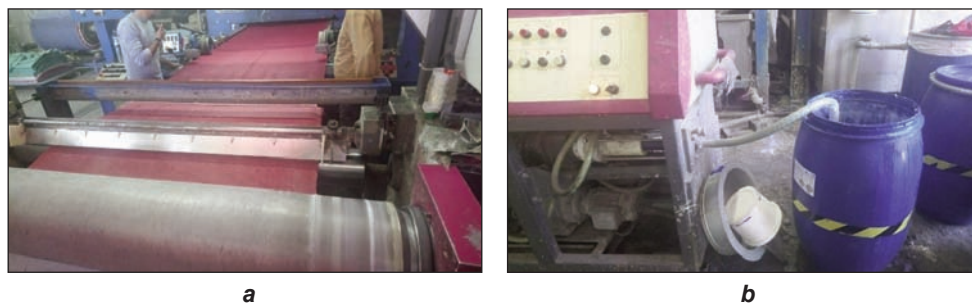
a – fabric coating with rotary screen technique; b – foam generator
